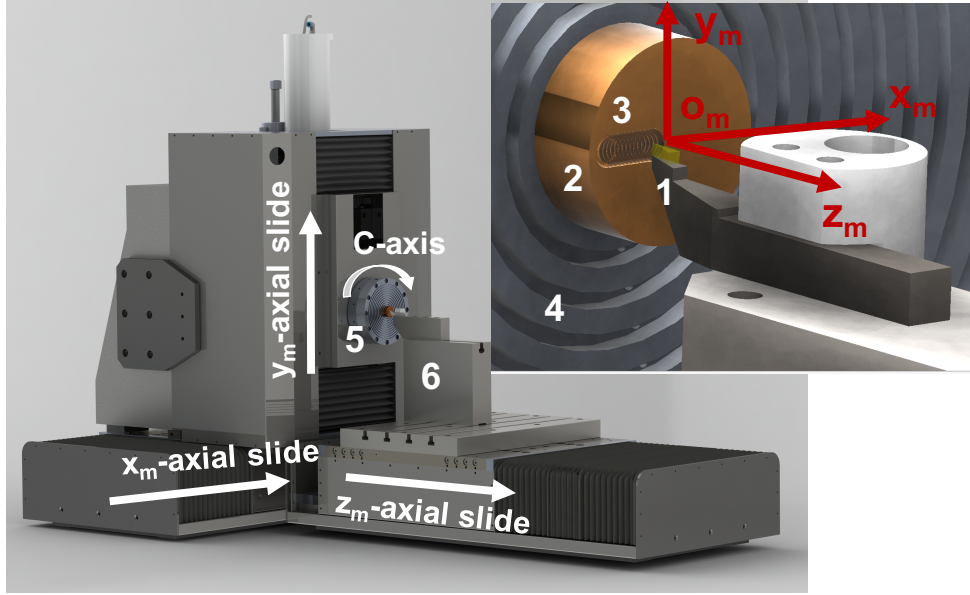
System configuration for micro/nanofluidic channel generation, 1 diamond tool, 2 sample, 3 generated channel, 4 vacuum chuck, 5 spindle, 6 tool holder.
